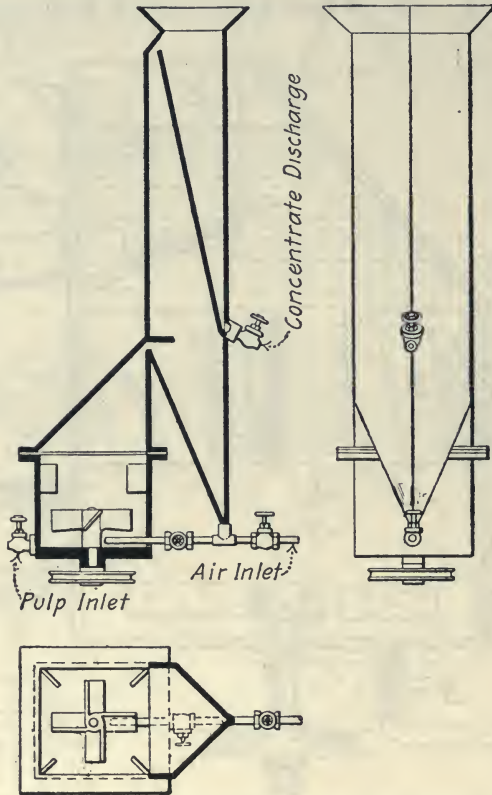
ANOTHER DESIGN OF WOOD MACHINE
